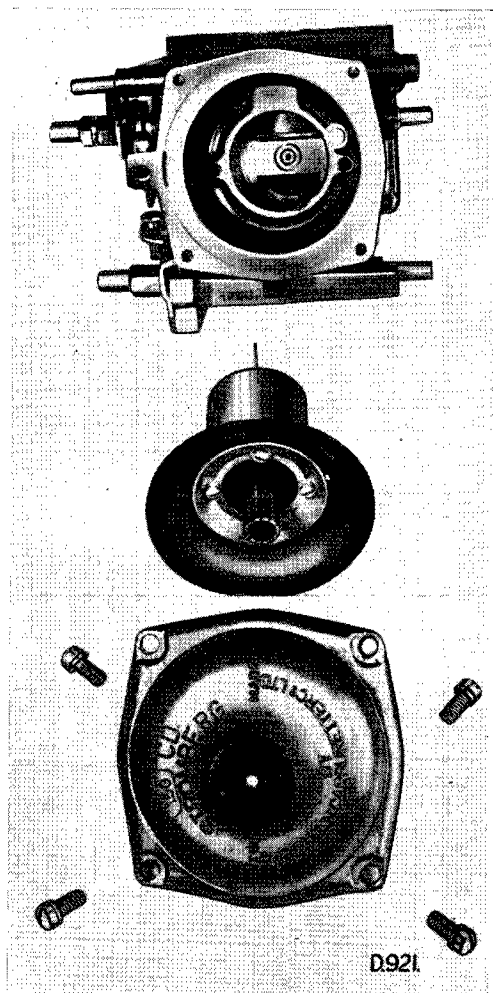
Top view of carburettor with cover and air valve assembly removed
